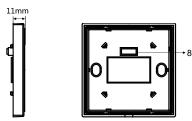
Dimensions – Side View Figure 5. Components - Back View
